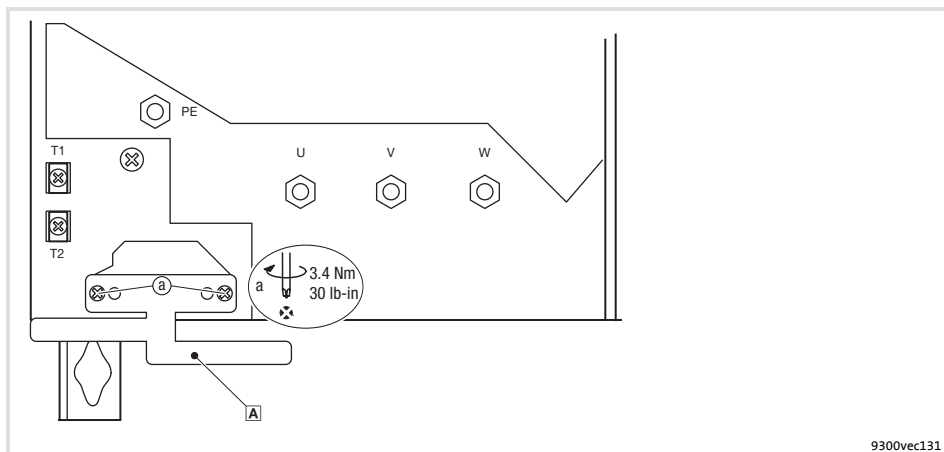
Installation of shield sheet for drive controllers 15 ... 30 kW
